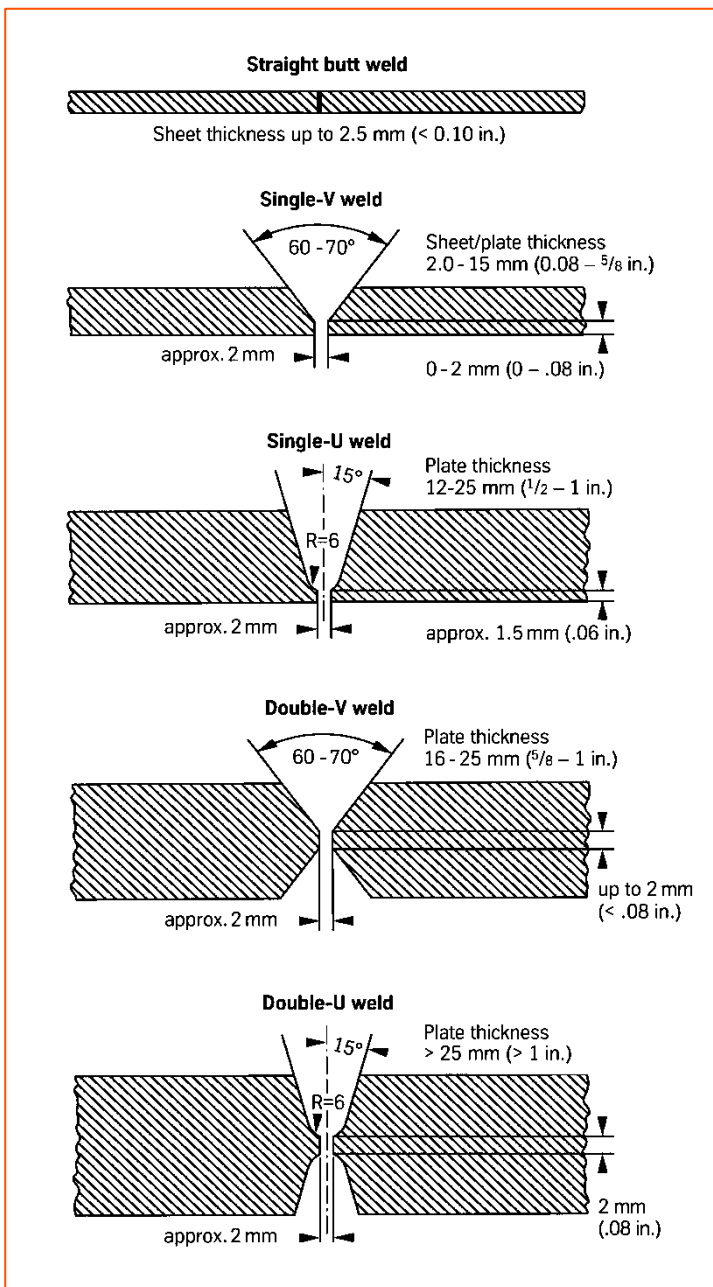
Seam preparation for welding nickel alloys and special stainless steels
